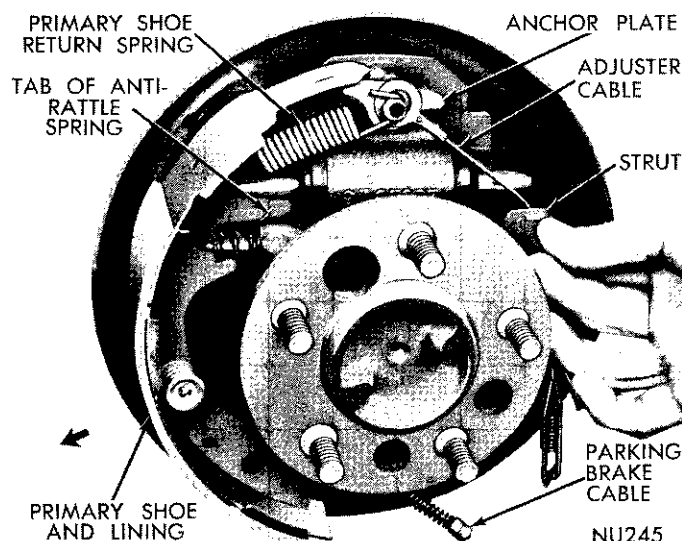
Removing or Installing Parking Brake Strut and Spring (Left Rear)
